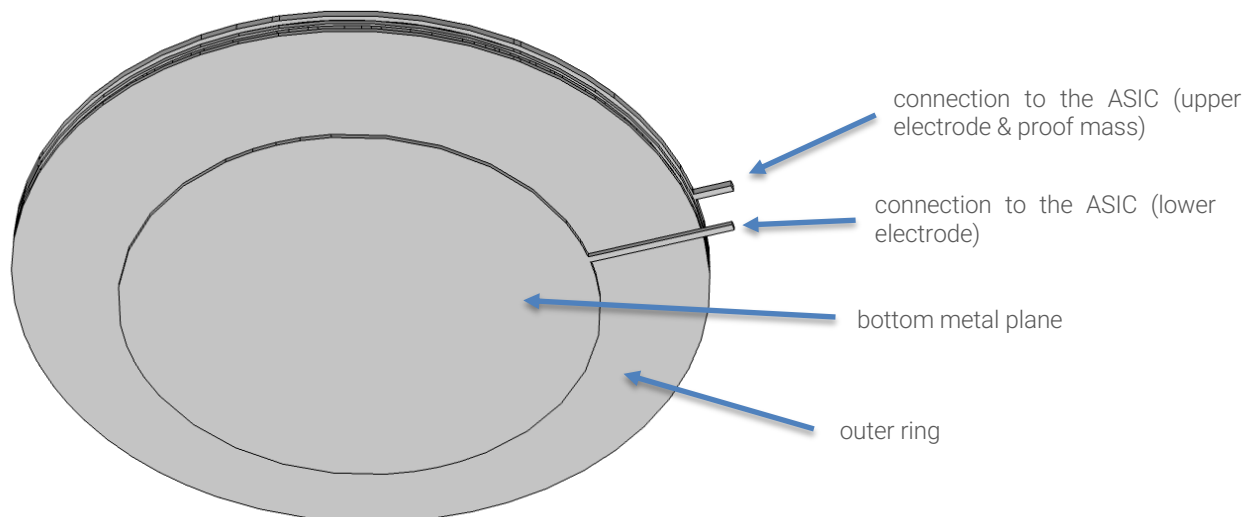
Full 3D CAD model of the metal layers without transparency. Bottom view.
